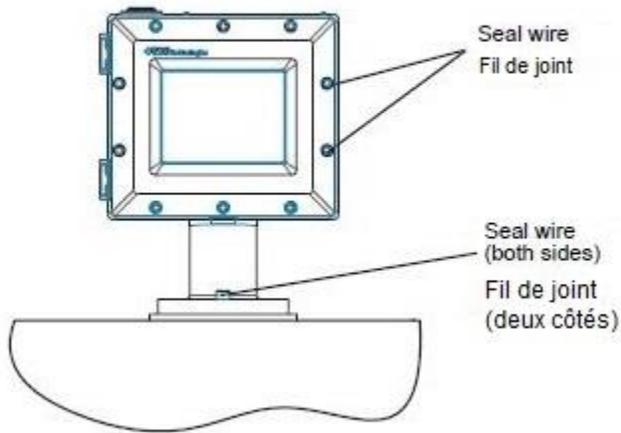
Ultrasonic Meter Control Assembly (blind cover version shown) / Ensemble de contrôle du compteur à ultrasons (version avec couvercle aveugle illustrée)
